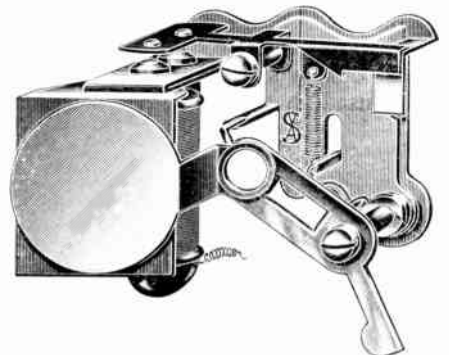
B.—MOVEMENT OF MECHANICAL INDICATOR.
